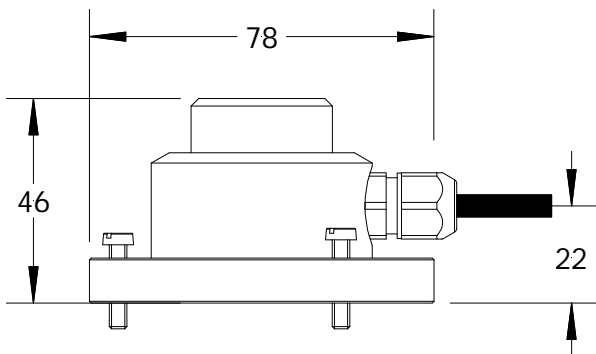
IR02 dimensions. Standard cable length is 5 m. Cable can be installed / replaced by the user.
